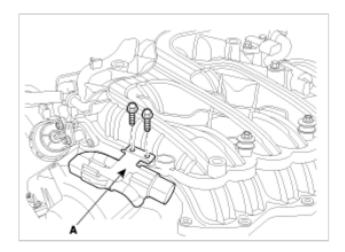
Identifying Surge Tank Connector Bracket With Mounting Bolts
